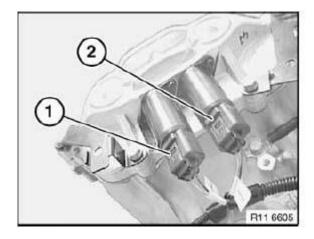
Identifying Plug Connections Courtesy of BMW OF NORTH AMERICA, INC.
